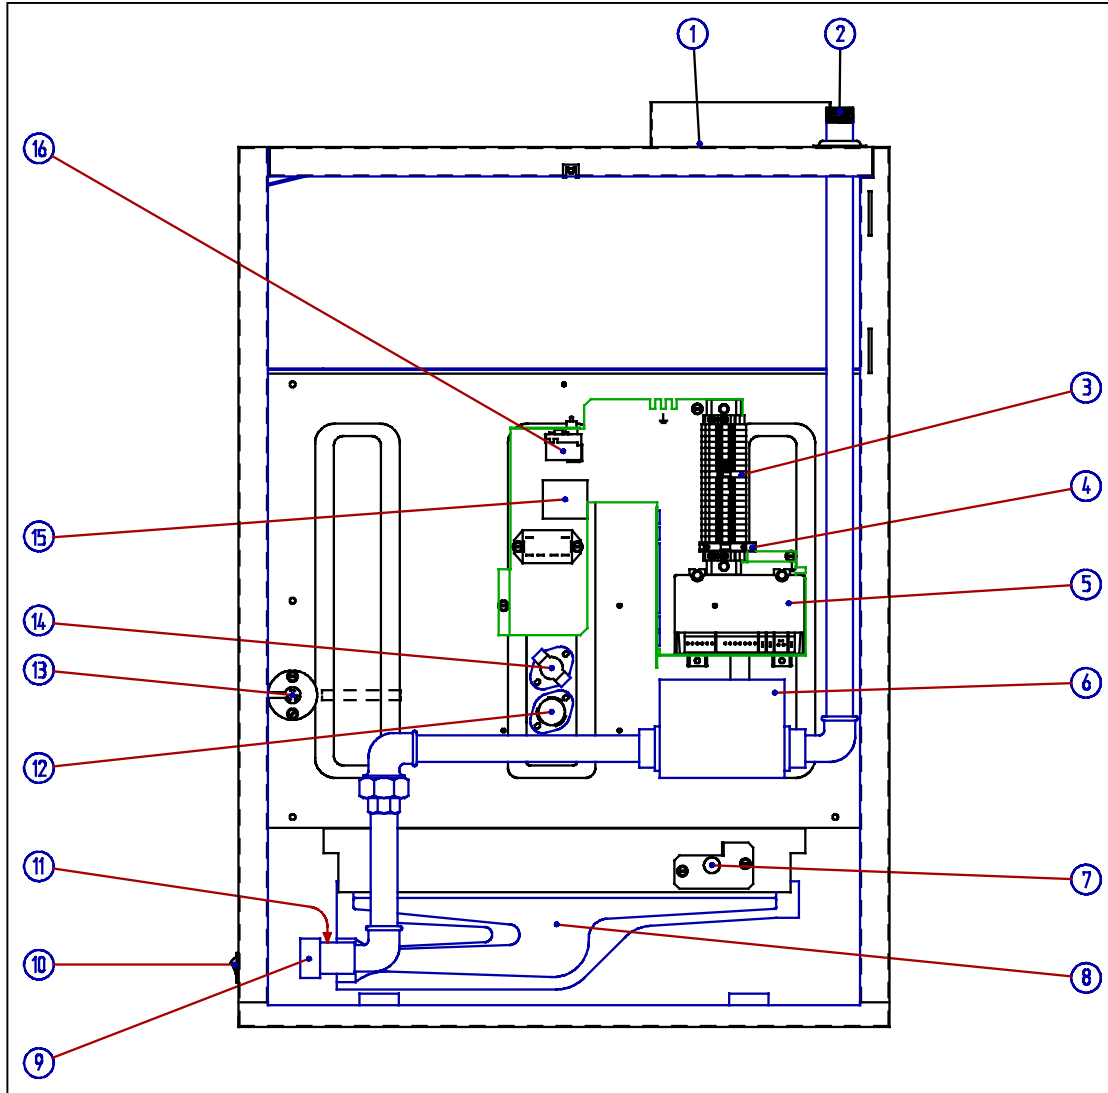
COMPONENT PARTS LOCATION FRI IGNITION BURNER CONTROLS
